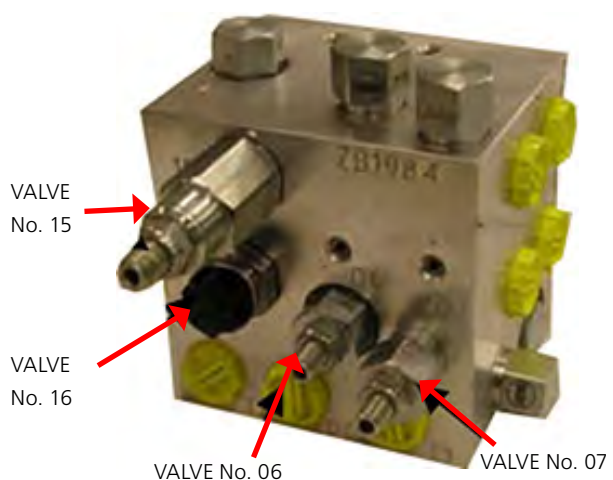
HYDRAULIC MANIFOLD P/N 645295-2
